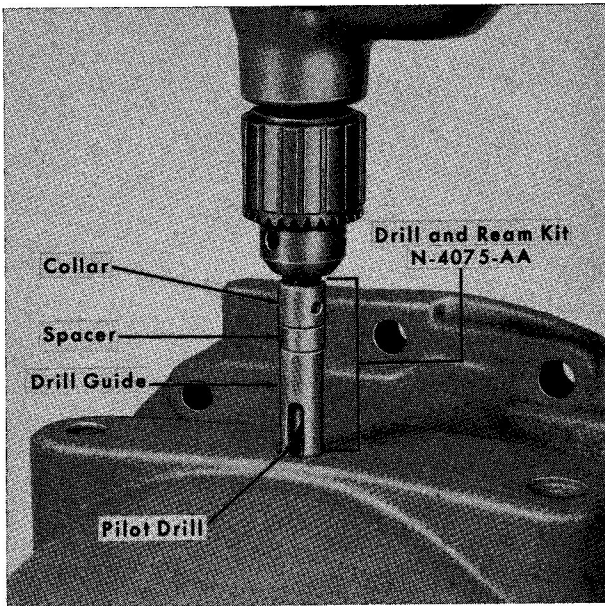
View showing installation of drill and ream kit. Refer to text.
